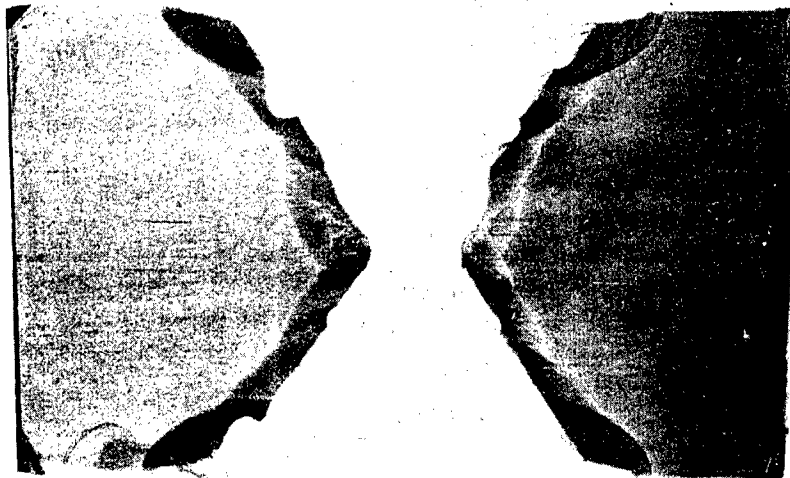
Cross-section of Standard Spray MIG Weld.
